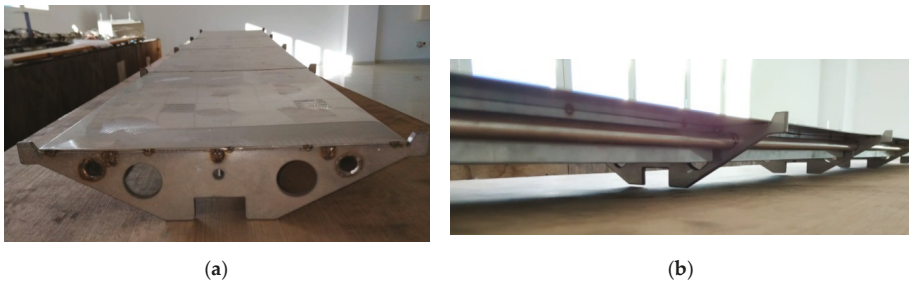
Assembly of a curved rectangular plate attached to a set of preformed ribs: (a) front view of the assembly and (b) lateral (longitudinal) view of the assembly.
